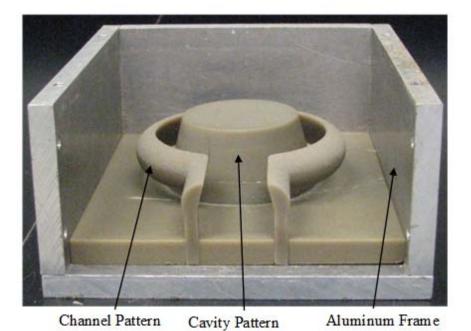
Profiled Conformal Cooling Channel pattern assembly inside the casting frame
